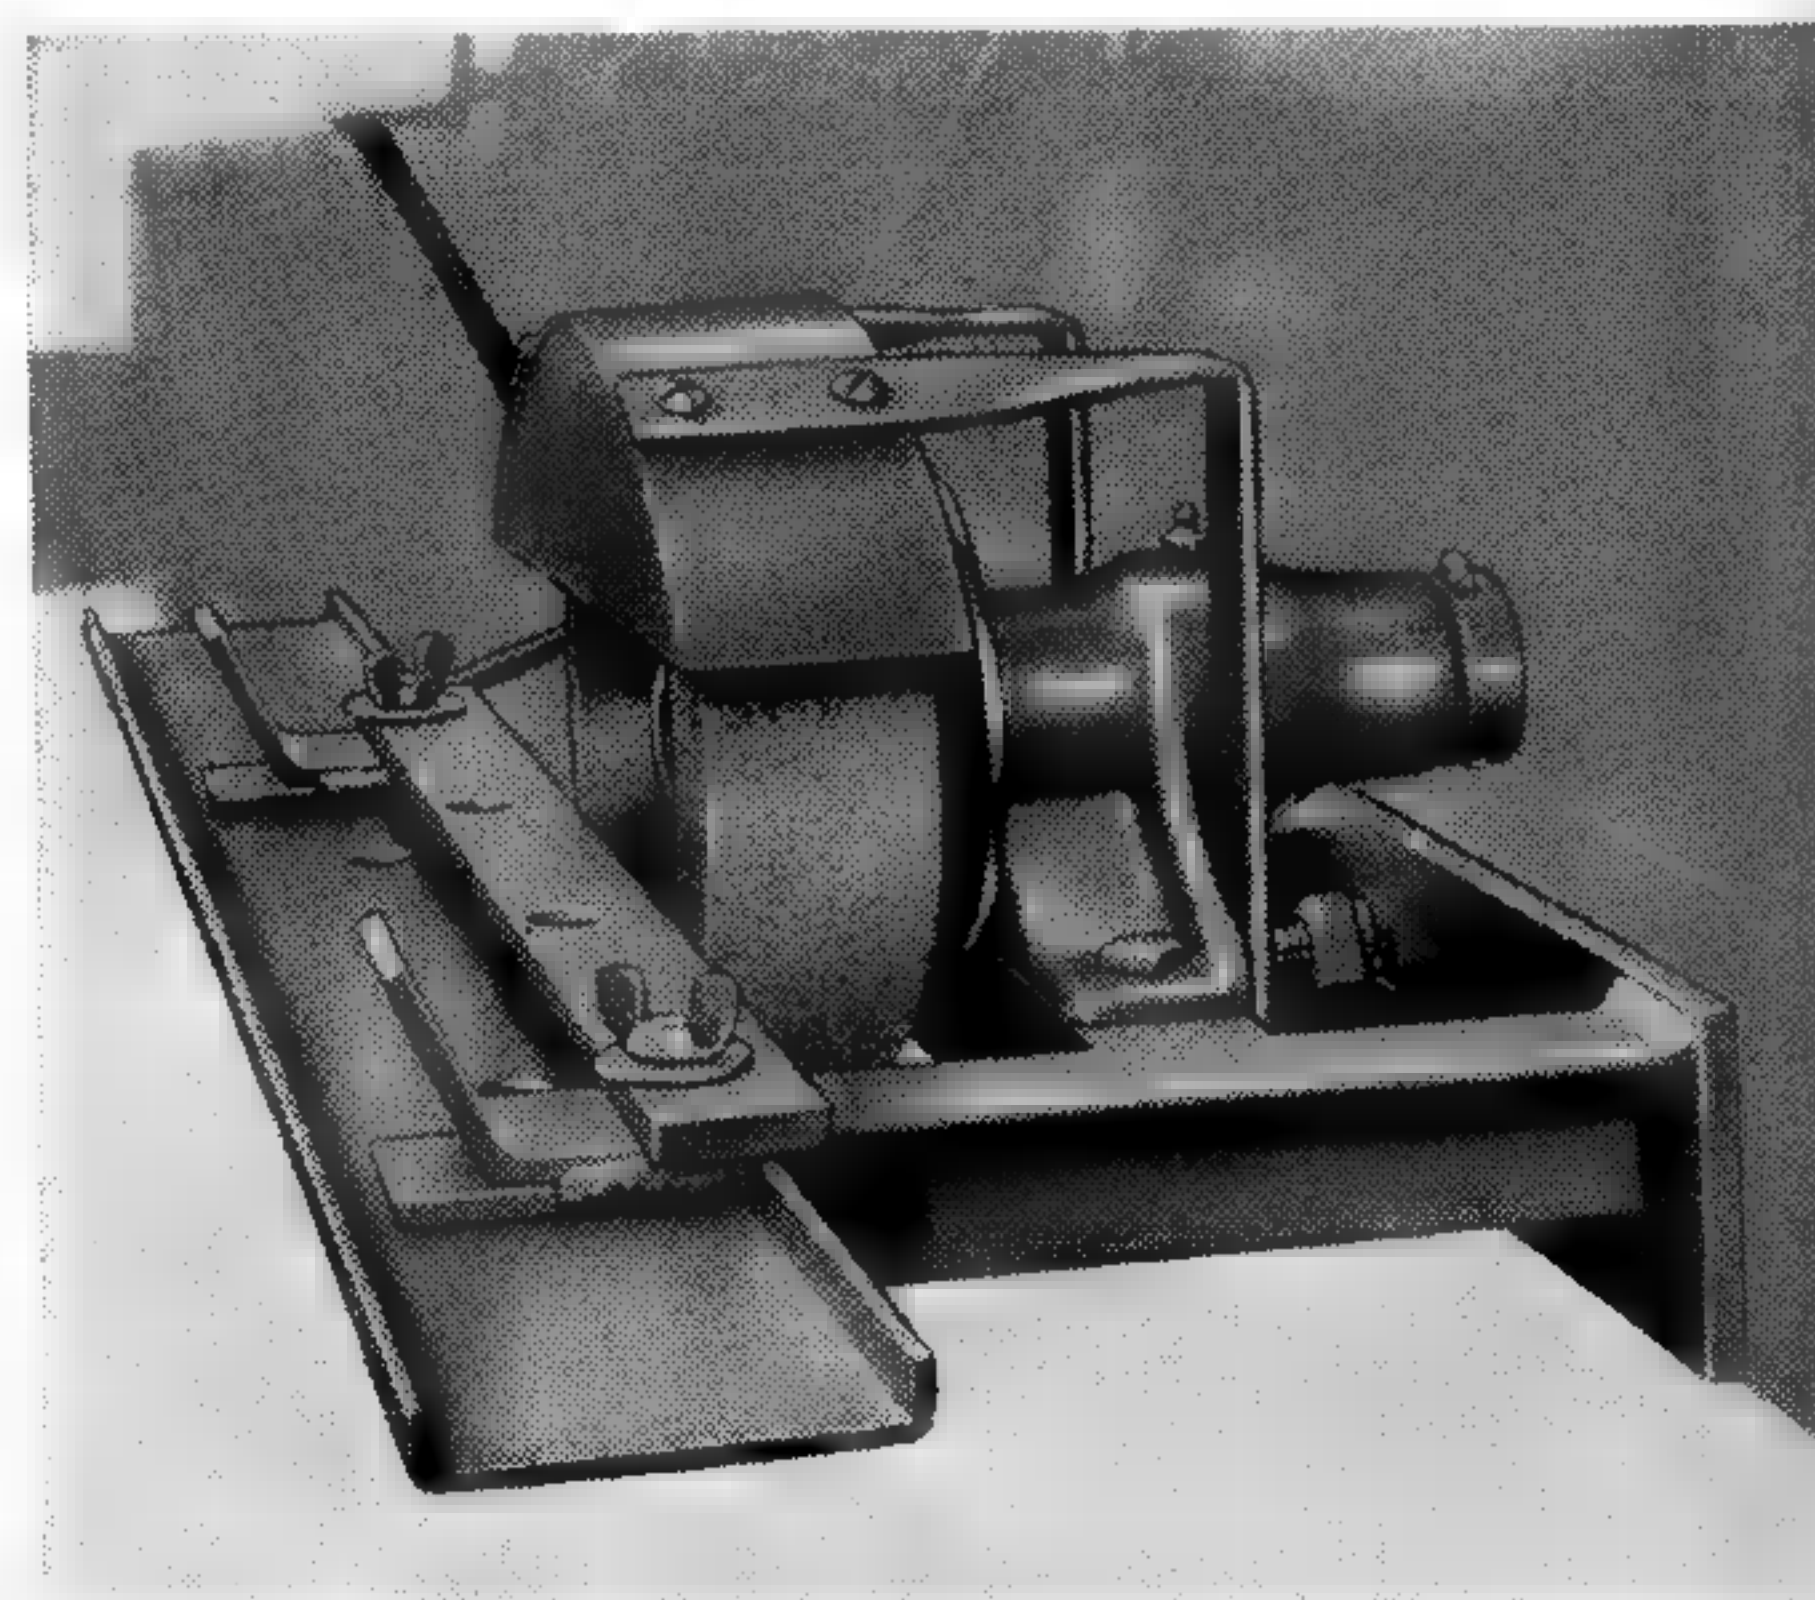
Sharpening the shear plate on the tractor-operated knife grinder.
